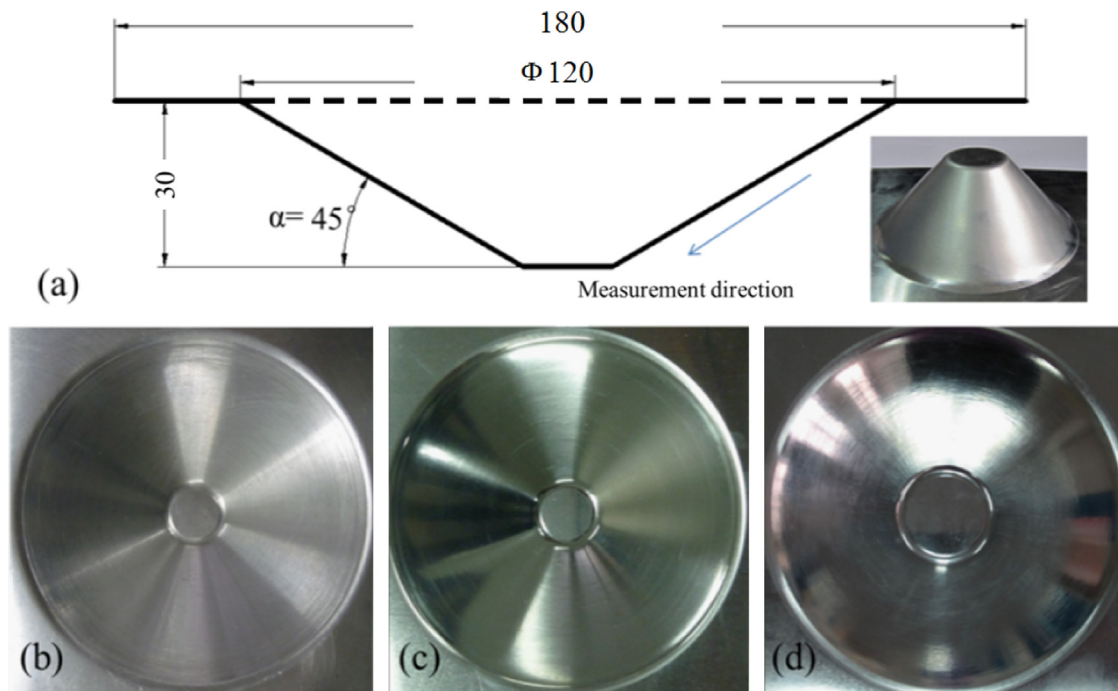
Cone part geometry (unit: mm): (a) geometric shape of the cone; (b) part processed by rigid tool; (c) part processed by VRB tool; (d) part processed by ORB tool.
